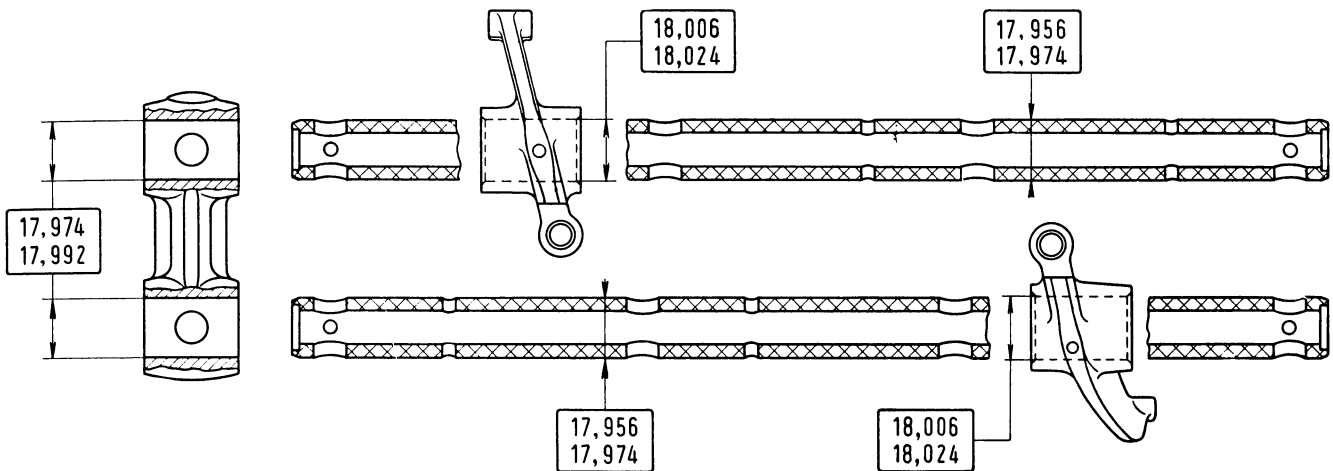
Critical dimensions of 115 C.005 engine rocker shafts, supports and rocker arms (in mm).
